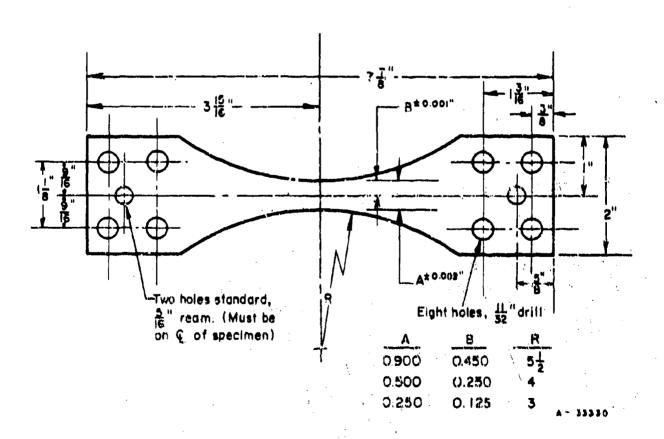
UNNOTCHED SHEET FATIGUE SPECIMEN
